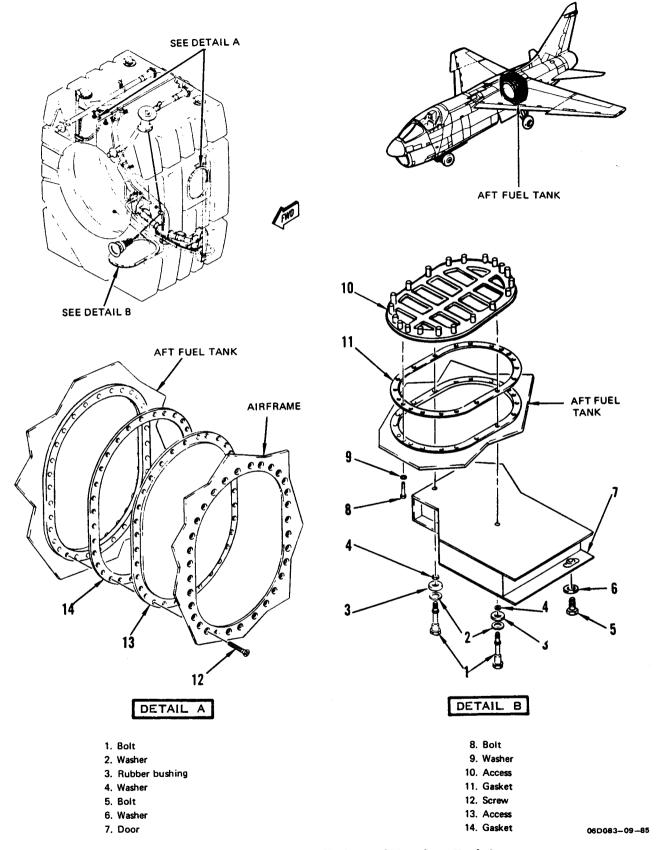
Removal and Installation; Aft Fuselage Tank Access
